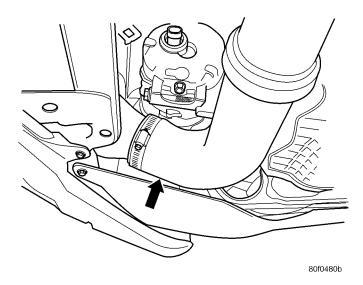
INNER COOLER LOWER MOUNTING - 2.4L TURBO
